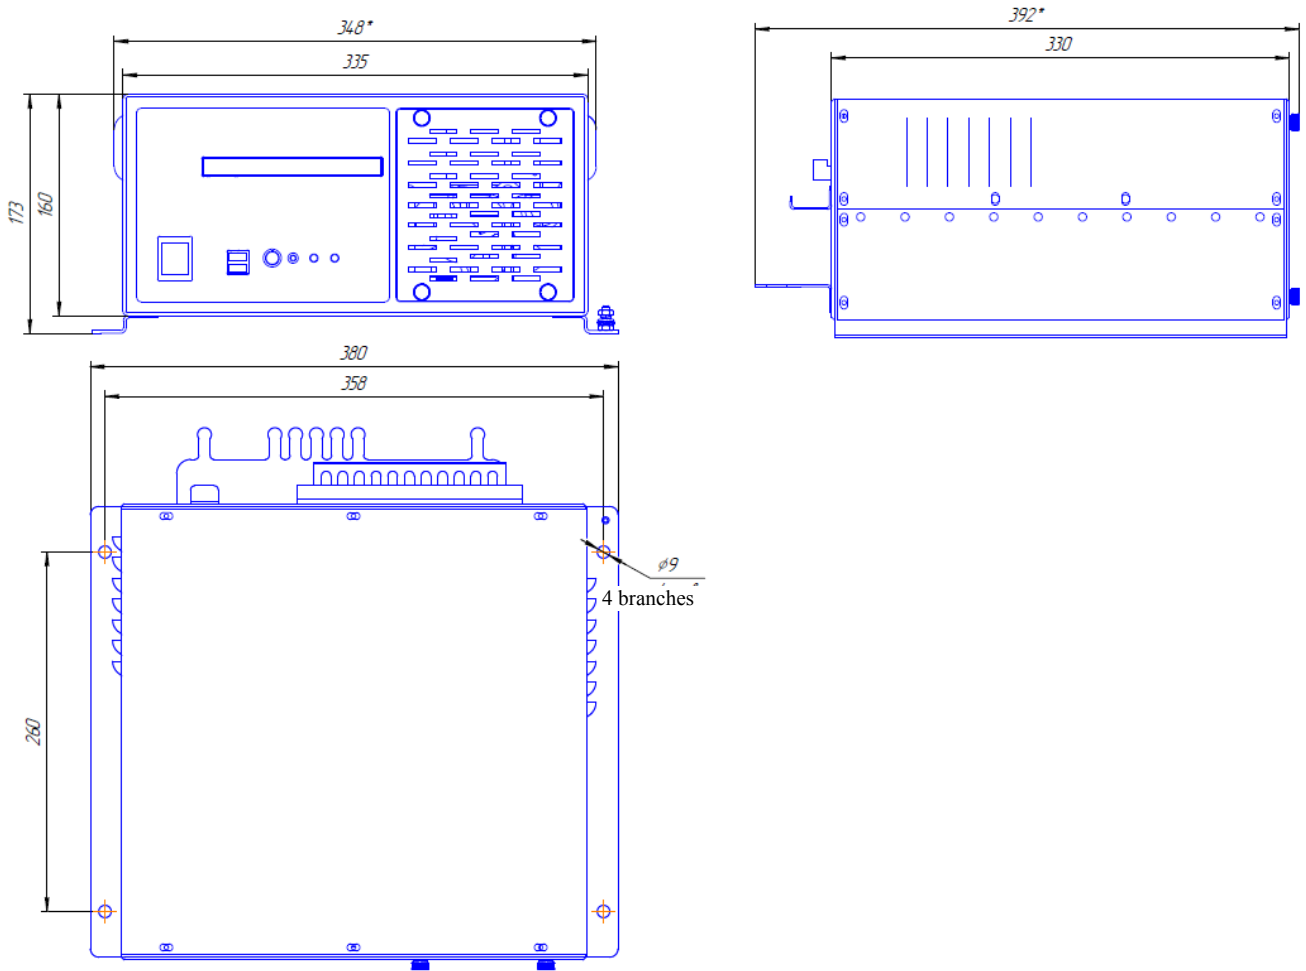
Dimensional Drawing of the Mainframe with Brackets
